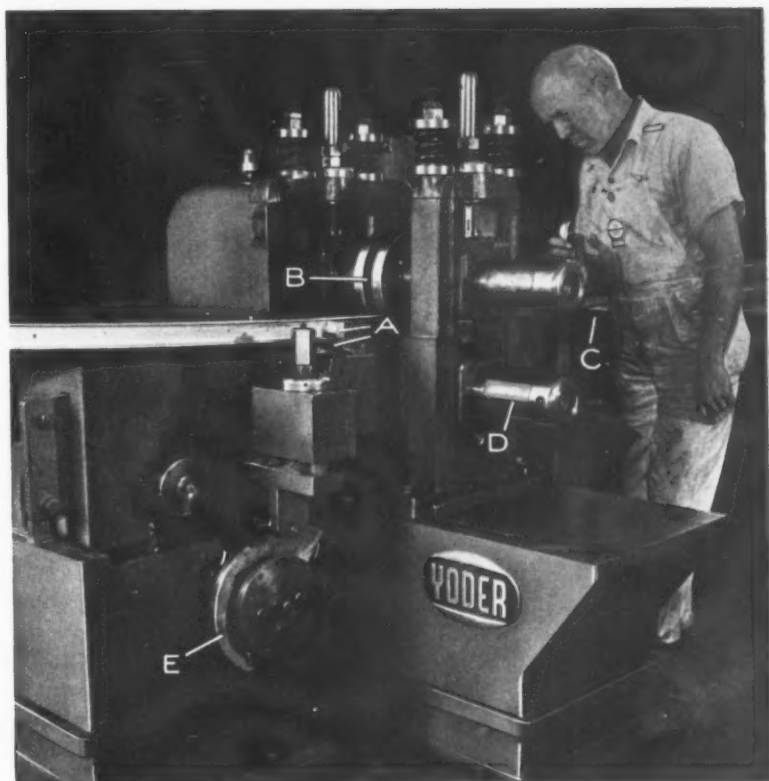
Cam Type Bending Machine, Showing the Principal Functioning Elements
